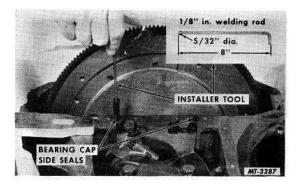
Installing Rear Main Bearing Cap Side Oil Seals. Insert Shows Details of Installer Tool Which Can Be Made Locally.
